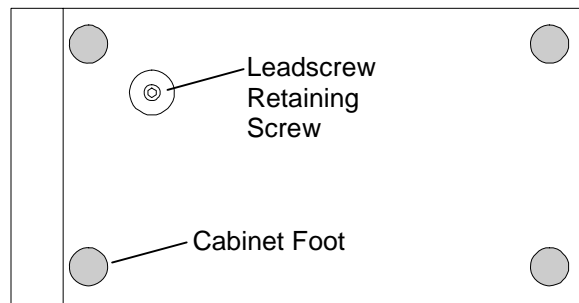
Single Bay TLS Cabinet – Bottom View
